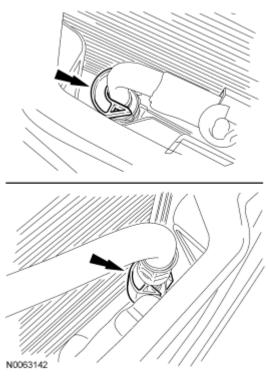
Identifying Fuel Supply Tube Courtesy of FORD MOTOR CO.
